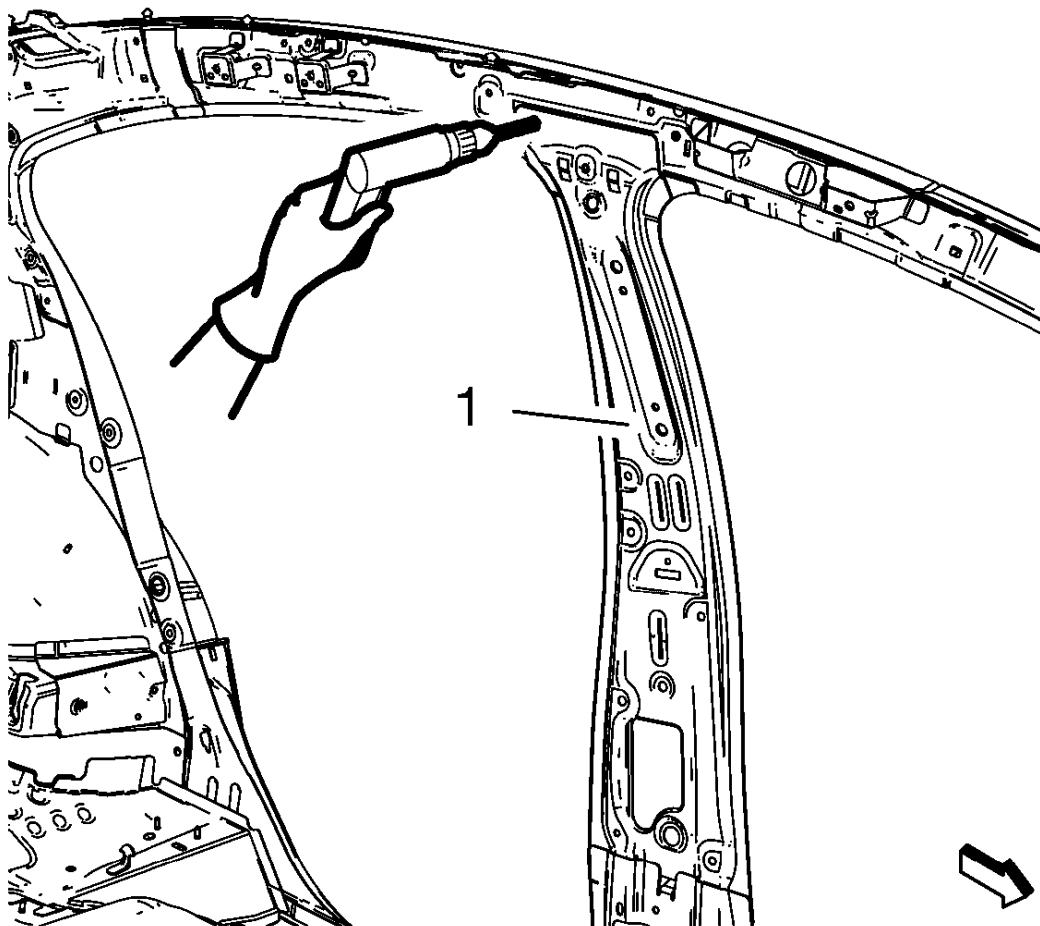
Drilling Factory Welds From Upper Center Pillar Inner Panel
